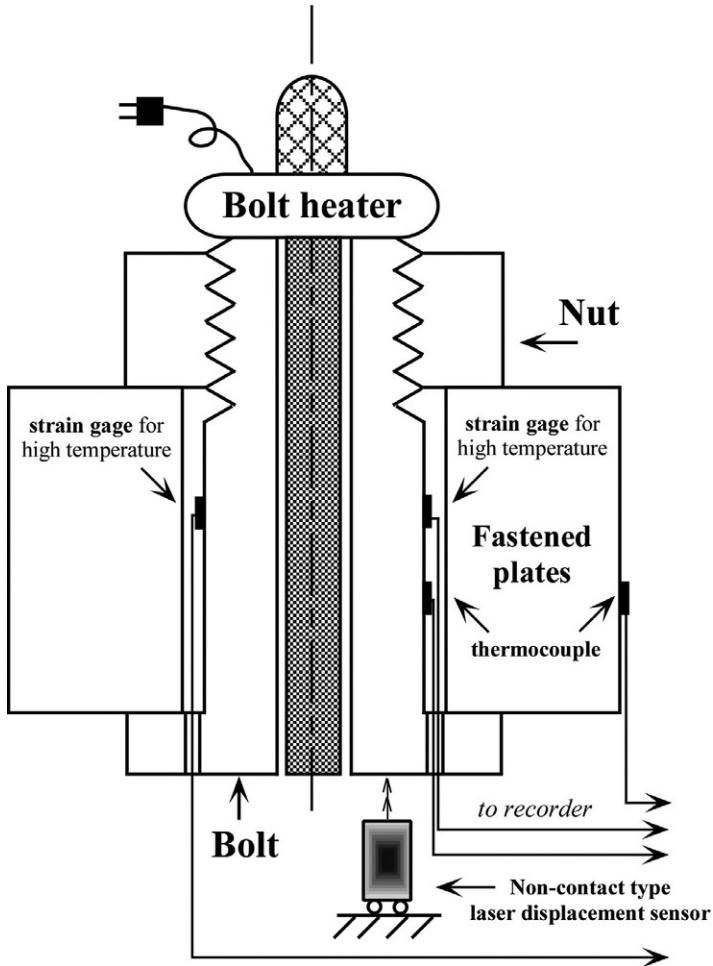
Bolt heater inserted into a hollow bolt for tightening operation.
